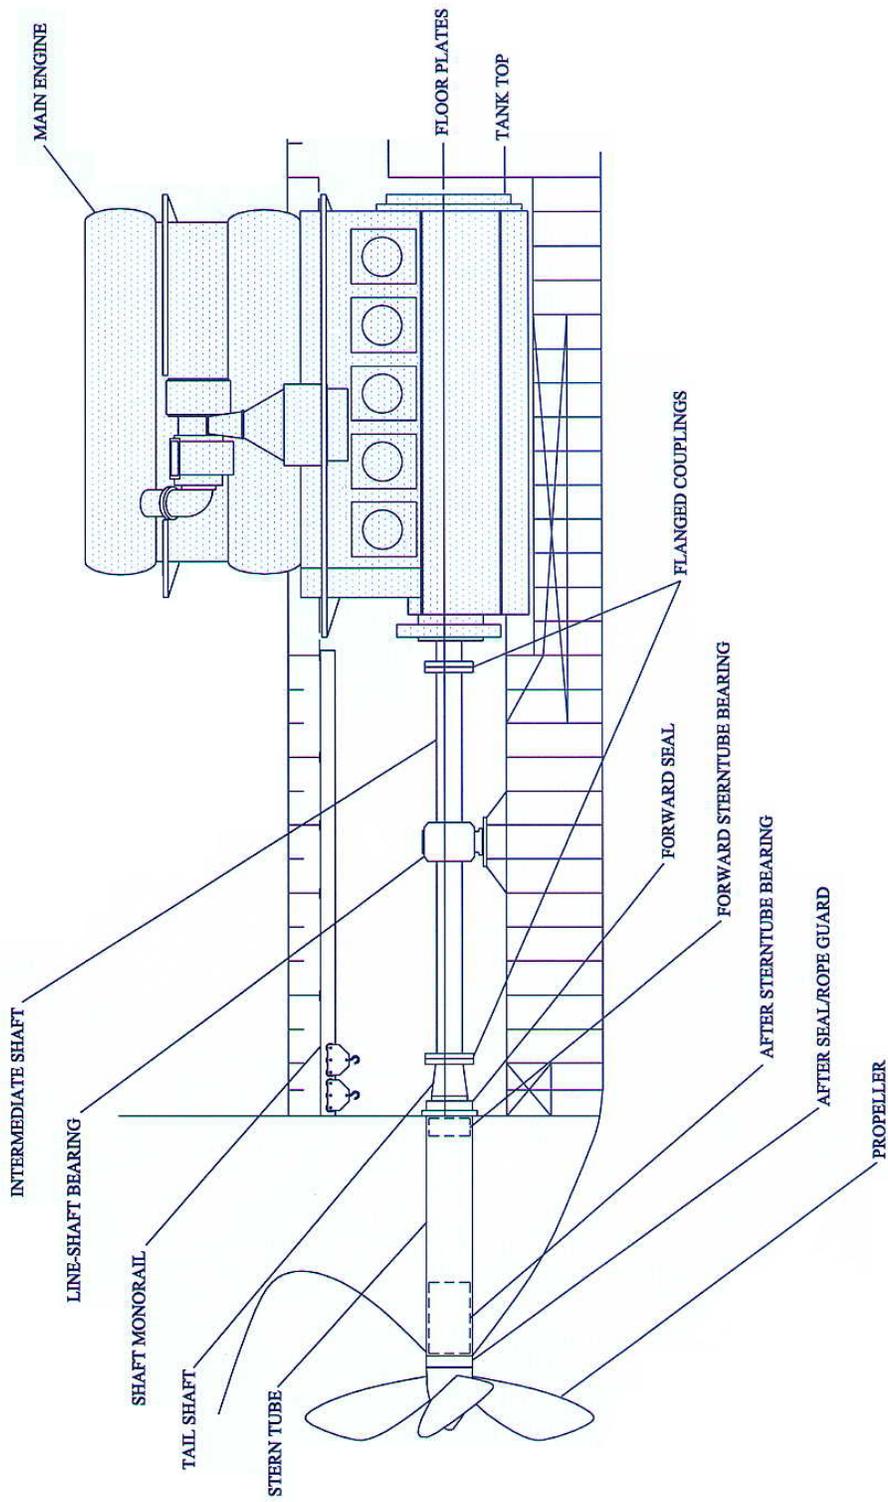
Typical Shafting for a Ship with a Low-Speed Diesel Engine
